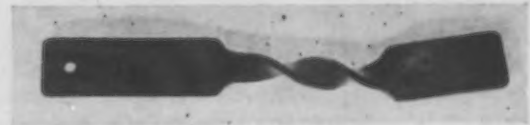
Tensile Bar Die Cast of the 4-3-0.1 Alloy Twisted Through 360 Deg. Without Fracture
